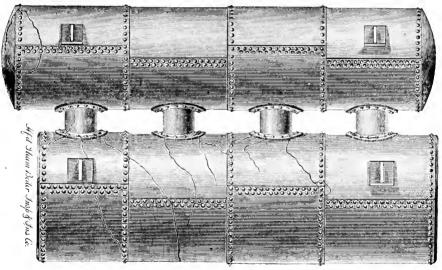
ELEVATION OF EXPLODED BOILER.
